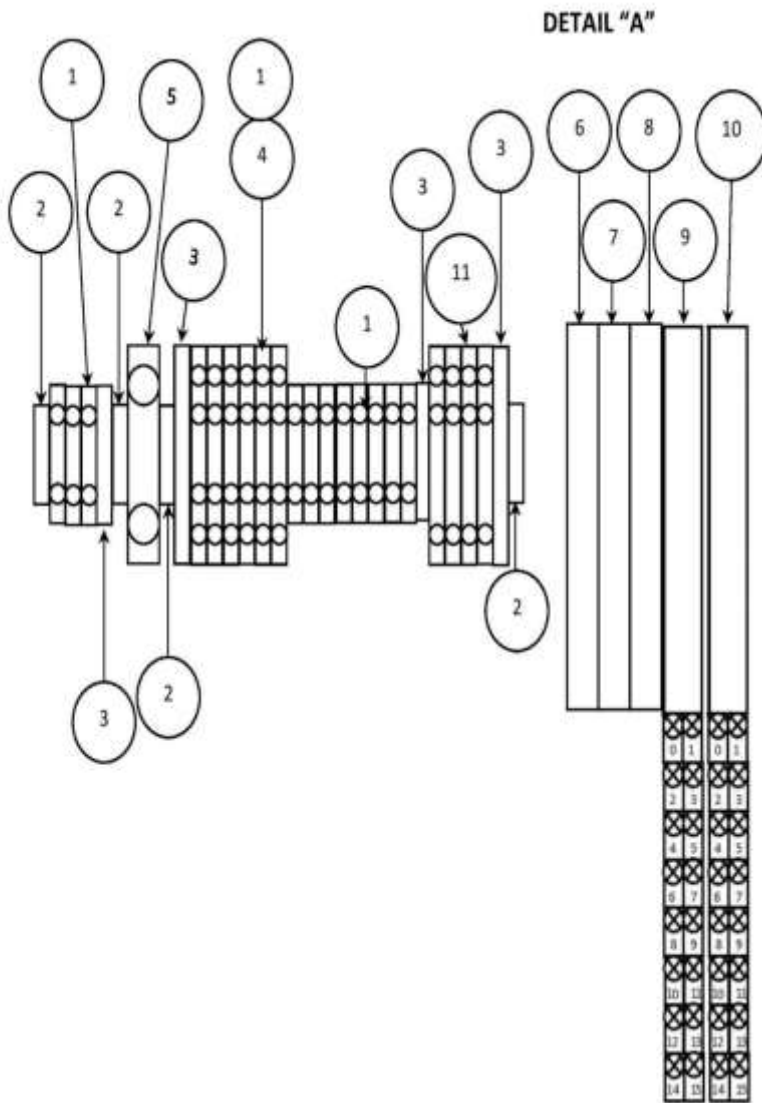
Way Side Control Panel Detail "A" Assembly Drawing
